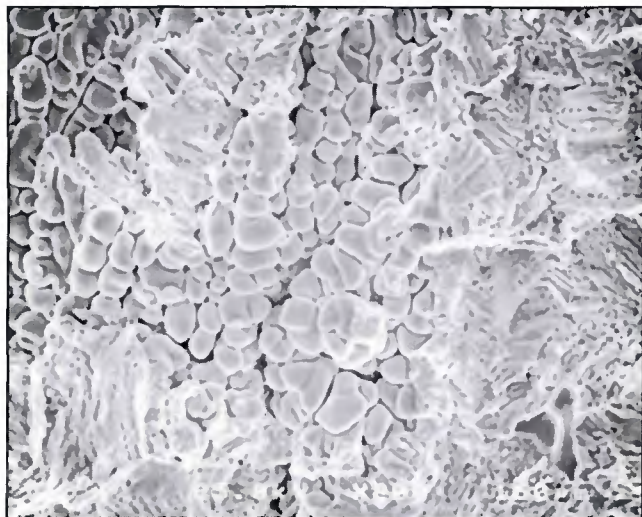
Fracture surface of a crack-like shrinkage porosity, showing dendrite surfaces.
